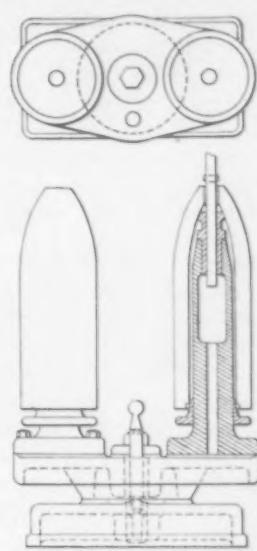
REVOLVING DOUBLE FIXTURE ARRANGED FOR MOUNTING THE SHELL FOR THE FINISHING AND REAMING OF THE NOSE HOLE
